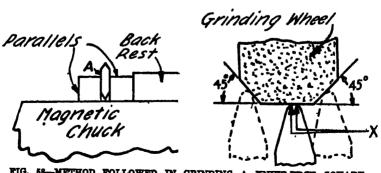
METHOD FOLLOWED IN GRINDING A ENUFE-EDGE SQUARE
